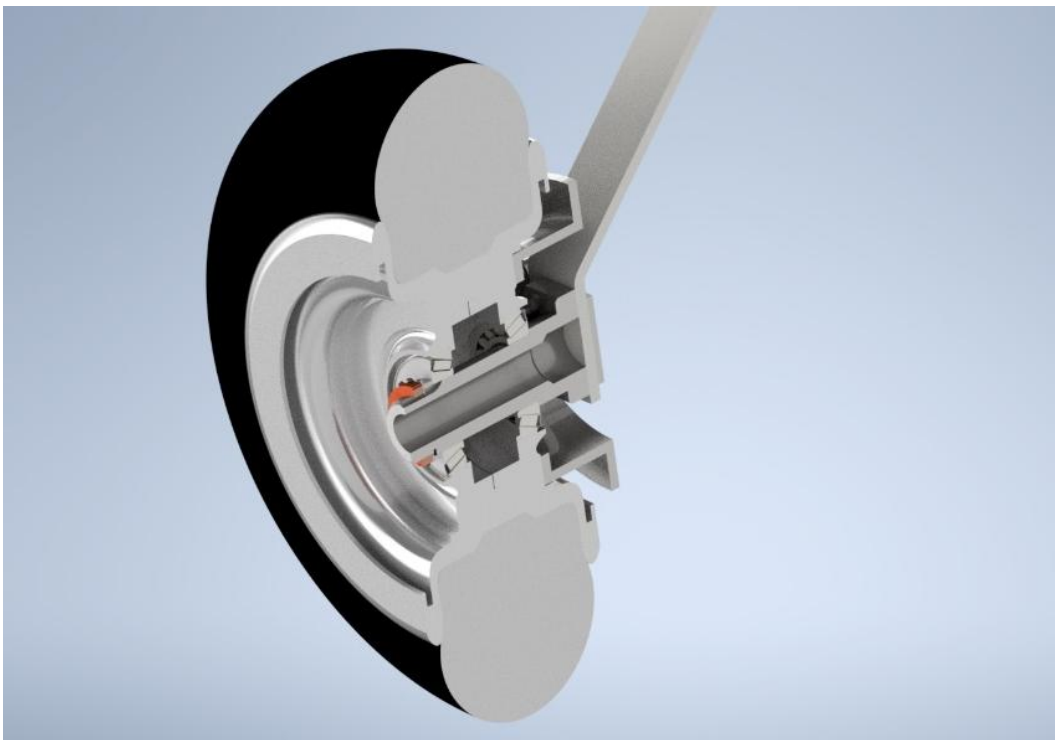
Sample Pictures: Cessna 172 Landing Gear reverse engineered
